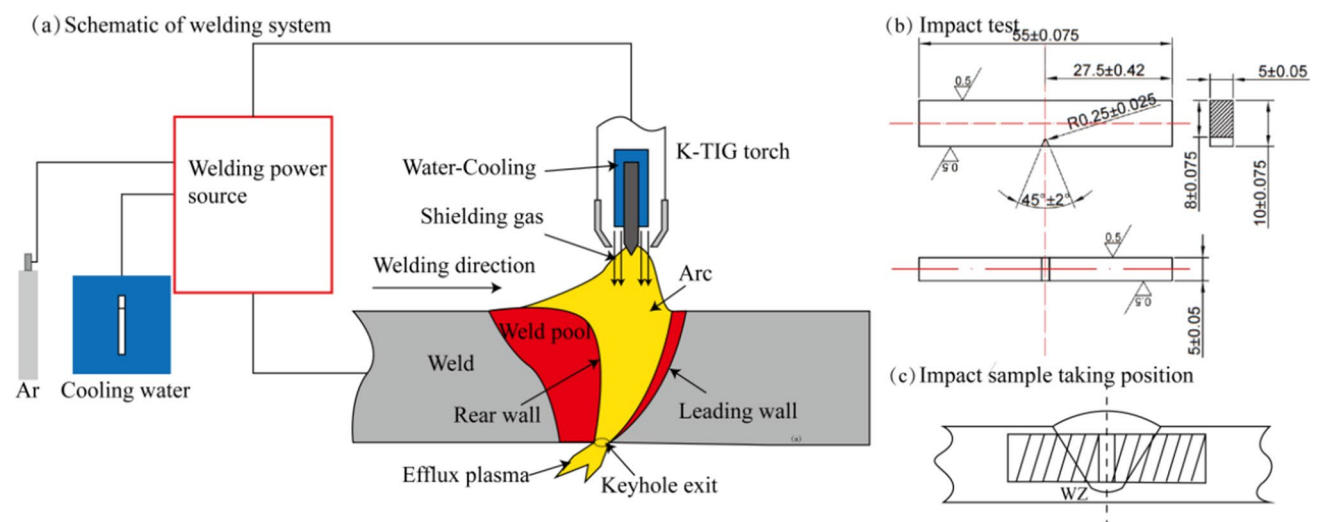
a K-TIG experimental system. b Impact test specimen. c Impact sample sampling location
